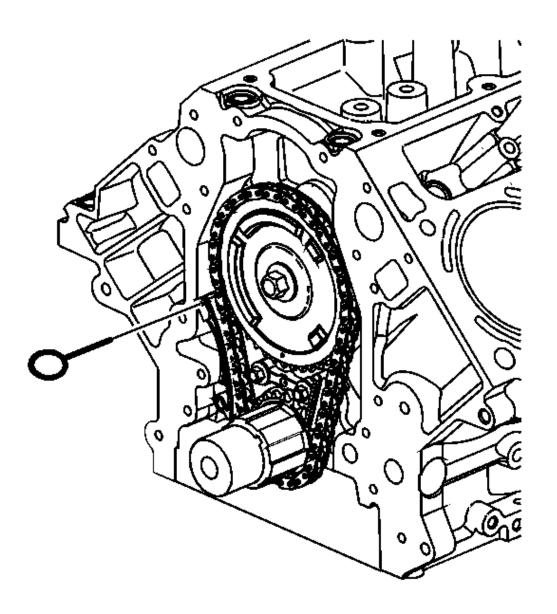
Locating Tensioner Pin Courtesy of GENERAL MOTORS CORP.
